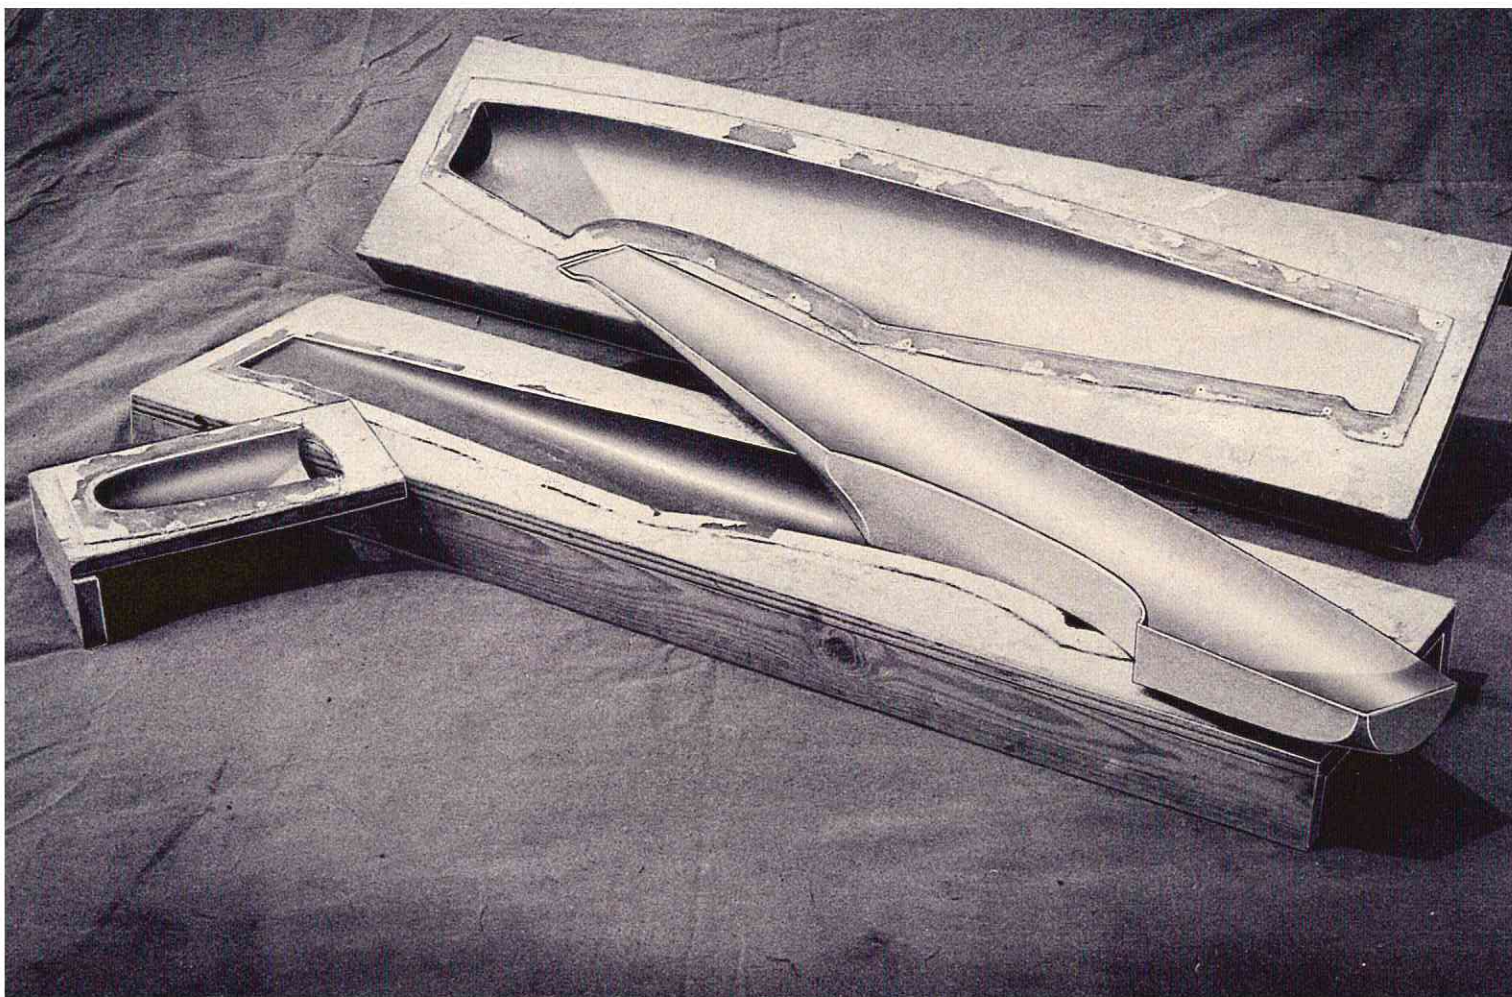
The Female Mold: The top mold has a finished fuselage half, yet to be released. The reinforced nose section can be seen. The lower fuselage mold has been released and the fuselage half is sitting free. The small mold contains a chin radiator cowl.
